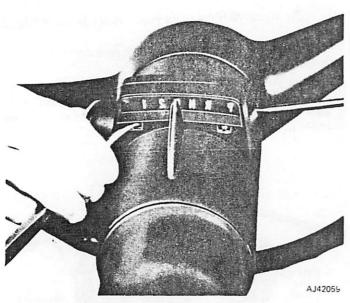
J-30 Shift Quadrant Retainer Clip Removal
